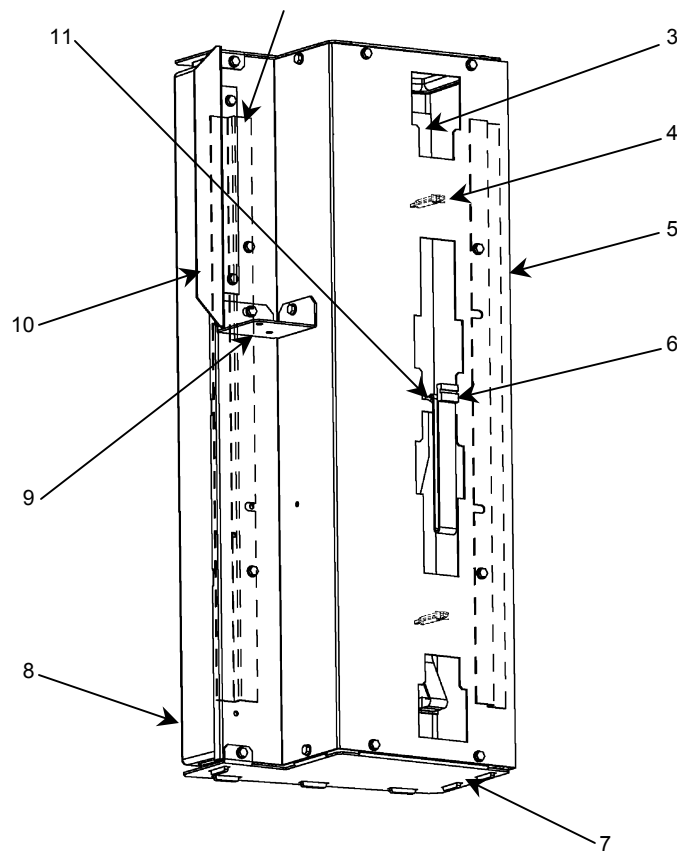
Pilaster Assembly (Left Hand Shown)
